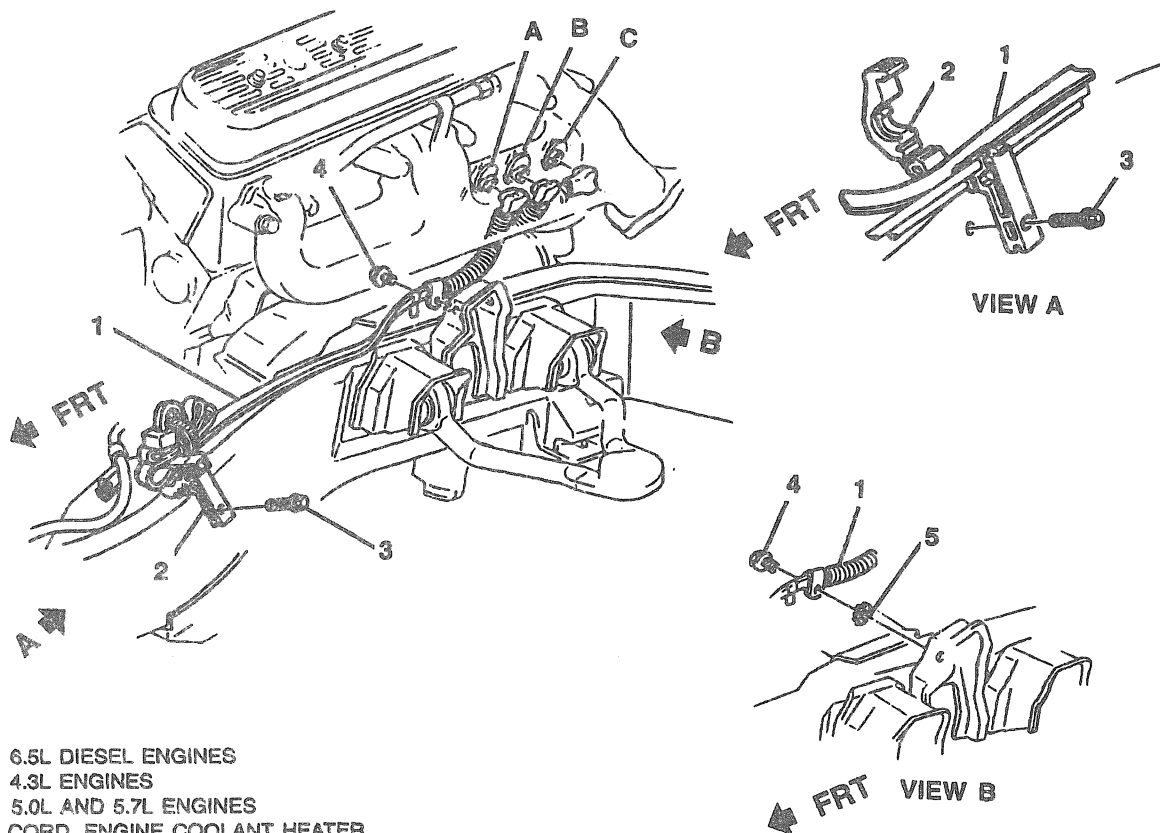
Engine Coolant Heater Cord Routing (Two-Wheel Drive Models)
